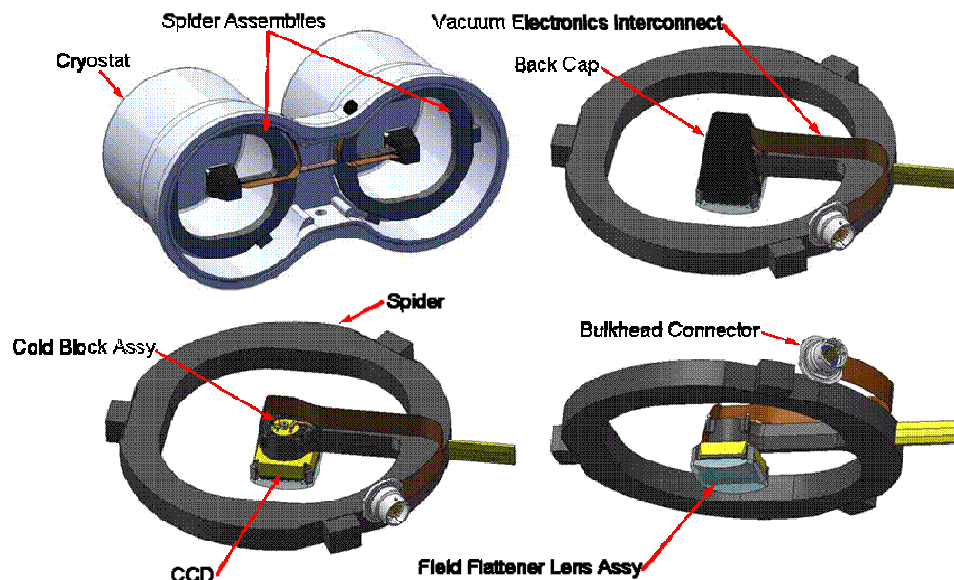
The illustration on the top left is a close up of the cryostat with corrector plates removed to show the location of the spider assemblies. The top right illustration shows the top of a spider assembly with the back cap installed. The two lower illustrations are different views of the spider assembly with the back cap removed.
